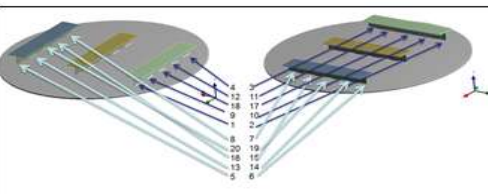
Total Deformation End to End plates transverse zig-zag welding sequence(WS-4)
